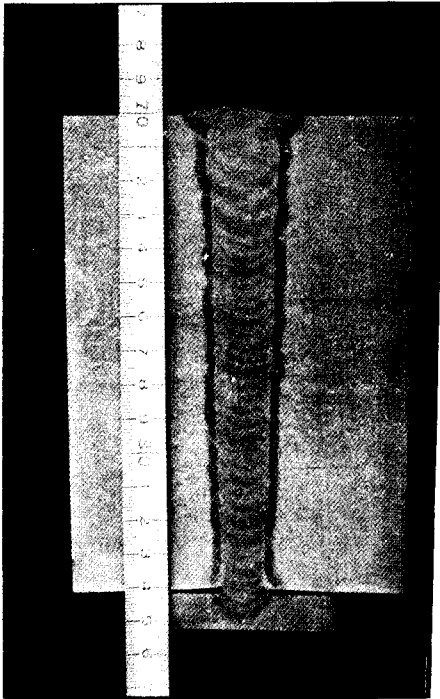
Cross-sectional view of narrow gap weldment.
